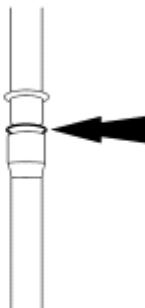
Locating O-Ring On Oil Level Indicator Tube
